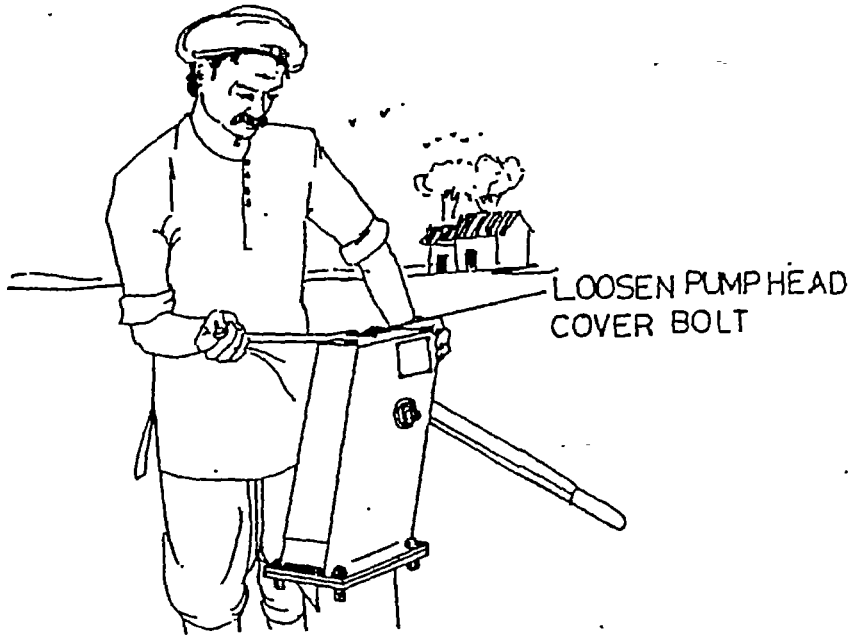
LOOSE HAND PUMP COVER BOLT
